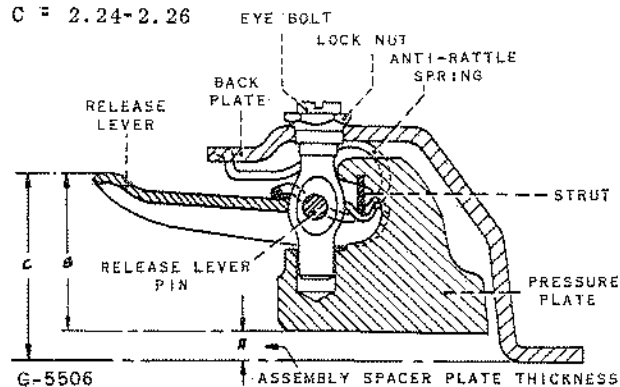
Sectional View of 12" A.S. Type Clutch
